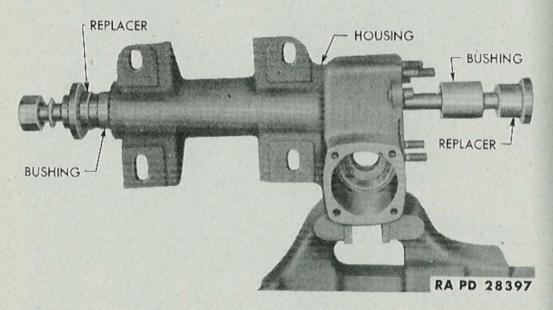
Replacer 41-R-2396-100 for Installing Roller Shaft Bushings
